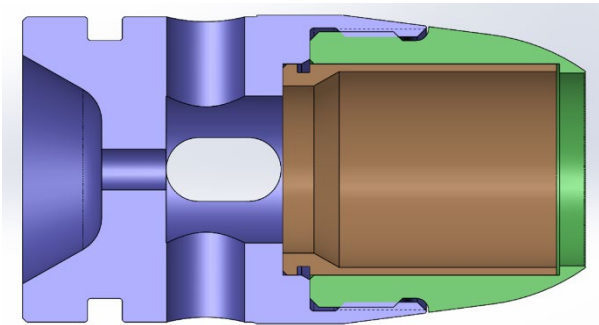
Novel PSWC barrel assembly including driver (blue), cutter (green), and aluminum sleeve (brown)
